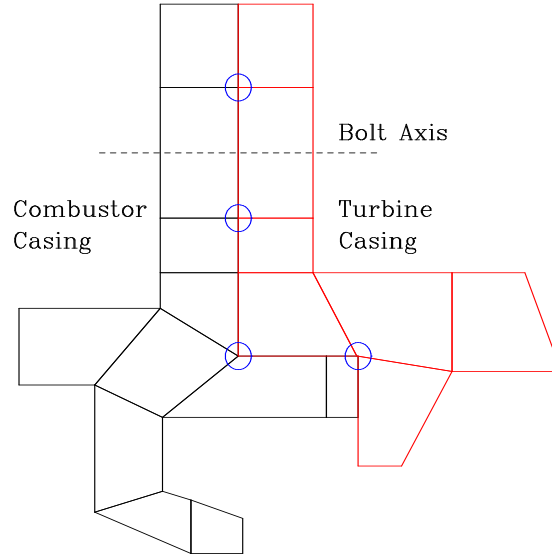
Assembly Cross-section Joint Model at the Mating Flanges
